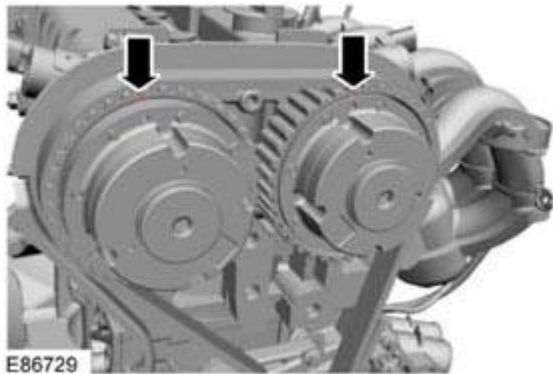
Locating Markings On Camshaft Phaser And Sprockets
